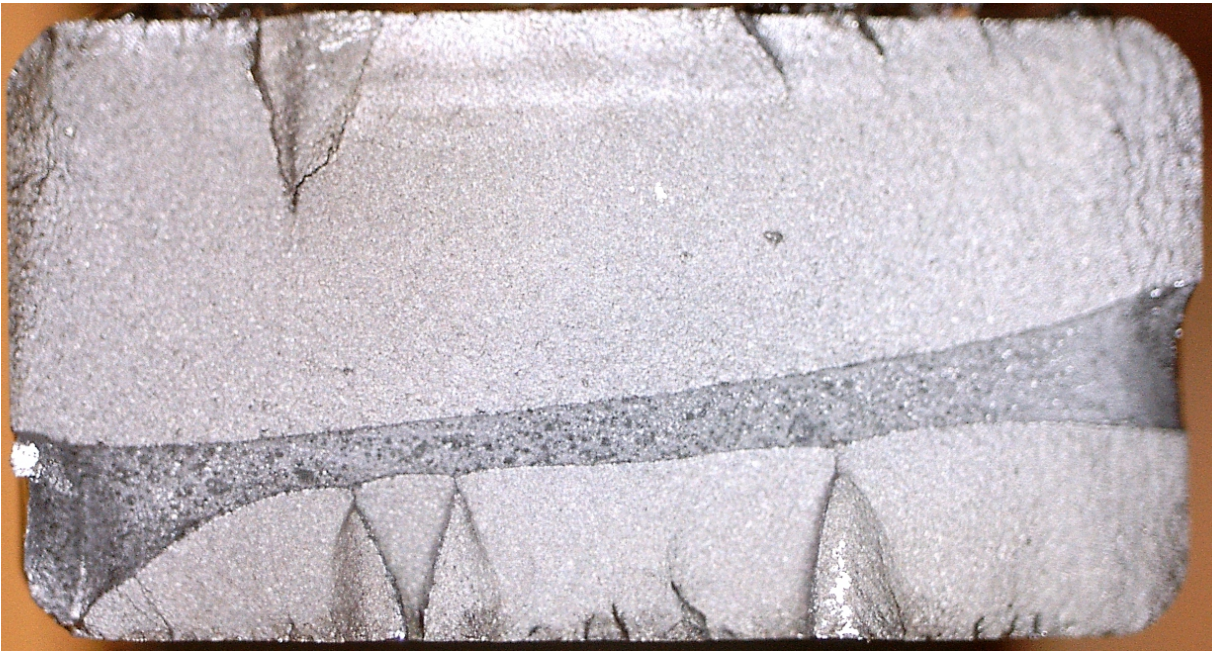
Fracture surface of specimen IT197-16, $2N_f=149,808$
